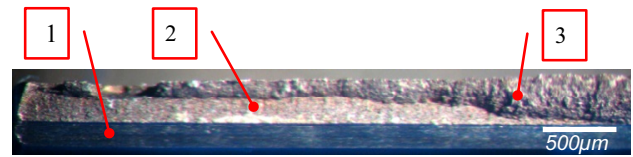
Fracture surface of Zry-4 CW cladding after testing at 250 °C: 1 – DHC crack; 2 – brittle fracture surface; 3 – notch (3). Specimen ID 5.1_5
